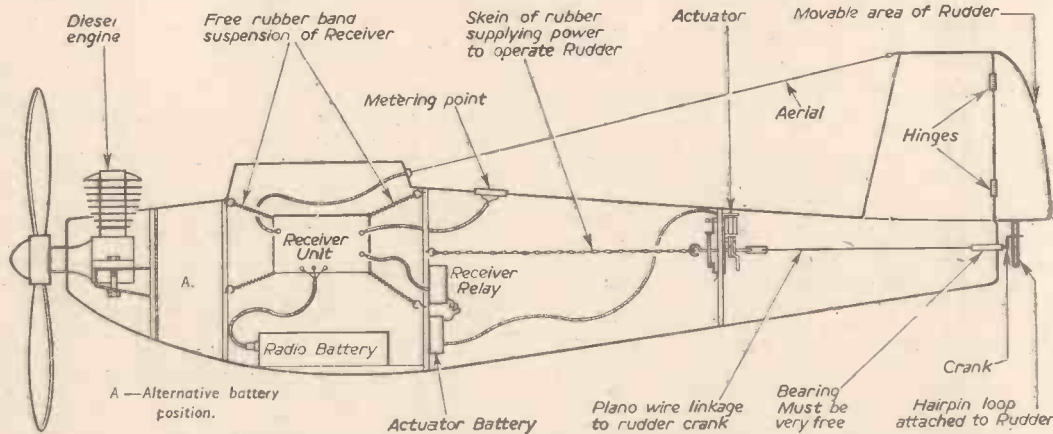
Lay-out of control gear in model plane. Flying trim is obtained by adjusting battery position.
